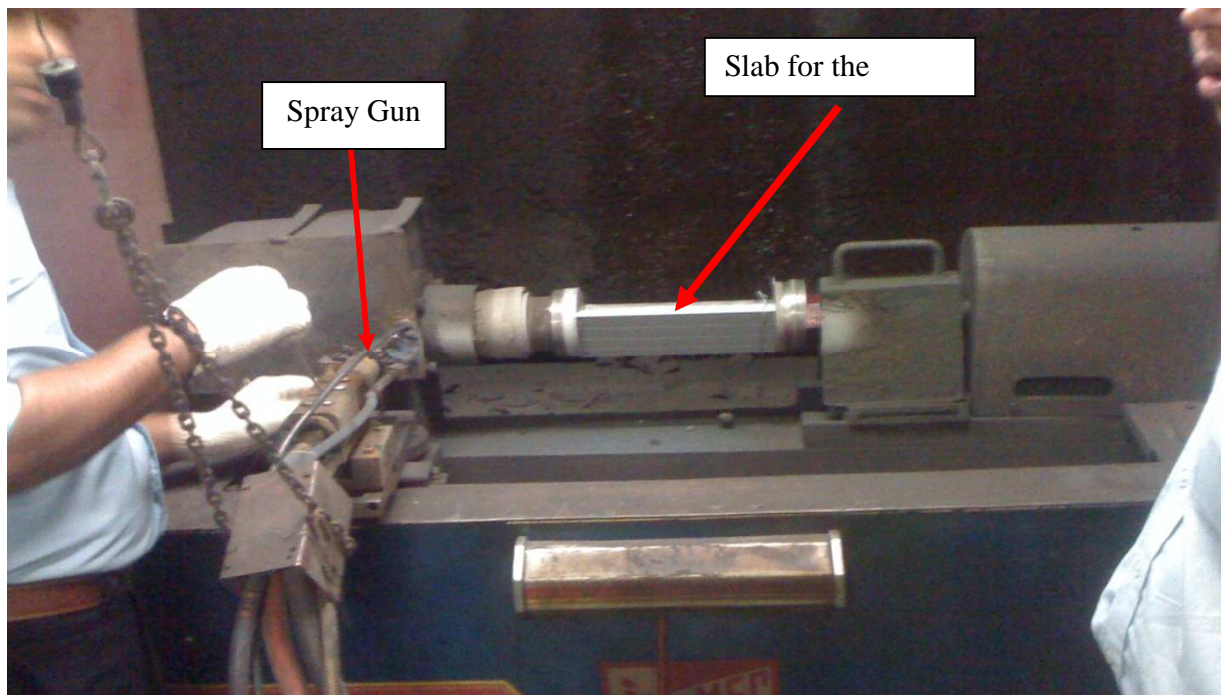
Air Plasma Arc spraying machine with the sample mounted on it for the purpose of coating
